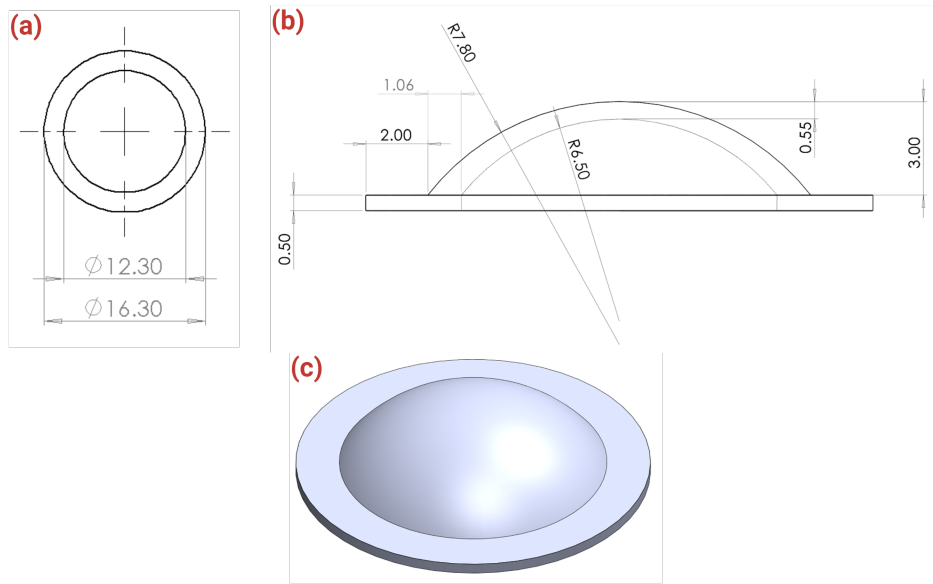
Geometry of the designed artificial cornea shown on the (a) top view, (b) side view, and (c) isometric view. All dimensions shown in millimeters.
